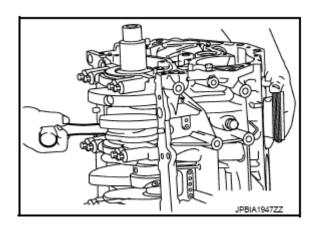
Pushing Piston And Connecting Rod Assembly Using Hammer Handle Courtesy of NISSAN NORTH AMERICA, INC.
